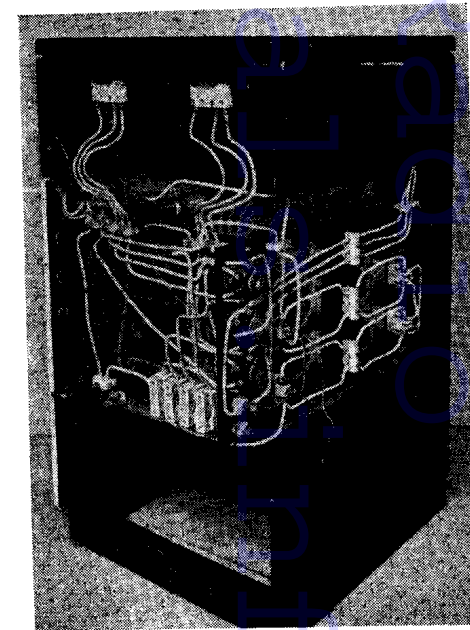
With back and side panels removed, all wiring, switches and fuses are completely accessible and the general construction of the cooker can be seen
